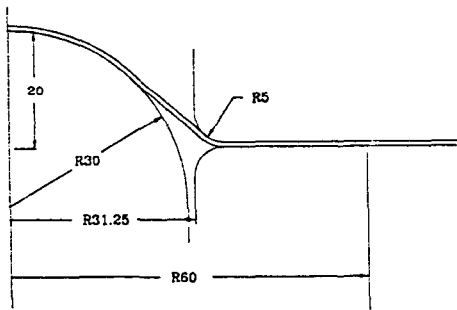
Schematic tool configuration for deep drawing of a hemisphere-bottomed cup (Initial punch height=20mm)
